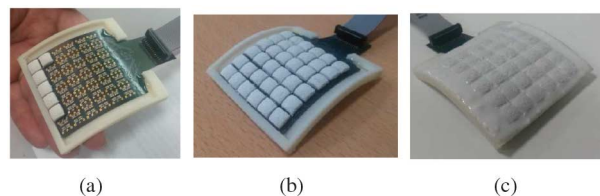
Flexible skin prototype during assembly phases: a) perspective view with some silicone caps bonded, b) perspective view with all silicone caps, c) completed skin prototype after the second silicone molding.
